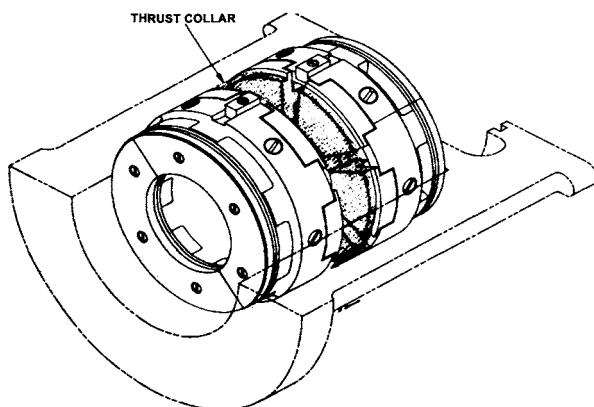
Double acting self equalizing thrust bearing assembly (thrust collar removed) (Courtesy of Elliott Company)
